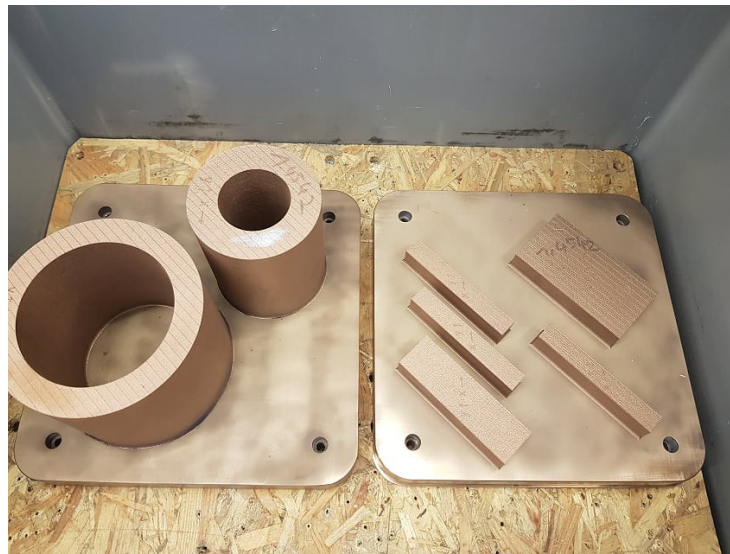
AM parts on the base plate after the heat-treatment (Courtesy Fraunhofer)
